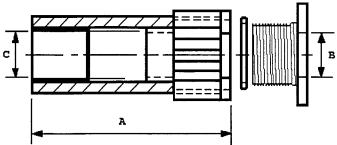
Type I-Single-Legged Standard Cable Entry Seals
